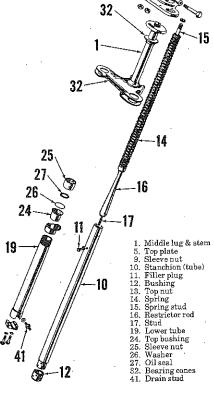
Exploded view of front suspension used on T20 and T20C models. Stem (1) rides on 1/4-in. diameter bearings. Fifteen are used in each race.
